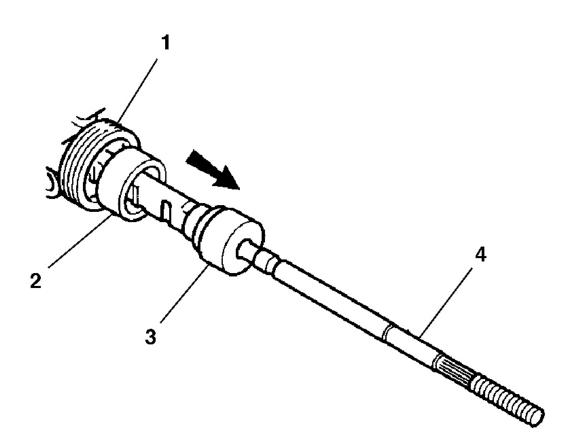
Identifying Shock Dampener & Inner Tie Rod Housing Courtesy of GENERAL MOTORS CORP.
